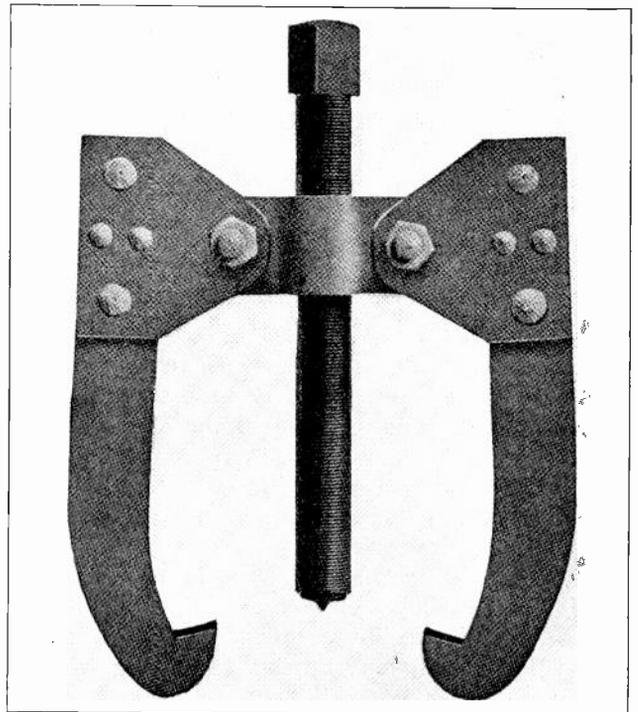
Simple gear or pulley remover, commonly called a gear puller. Tight fitting gears and pulleys can be removed from shaft ends with such a device.
